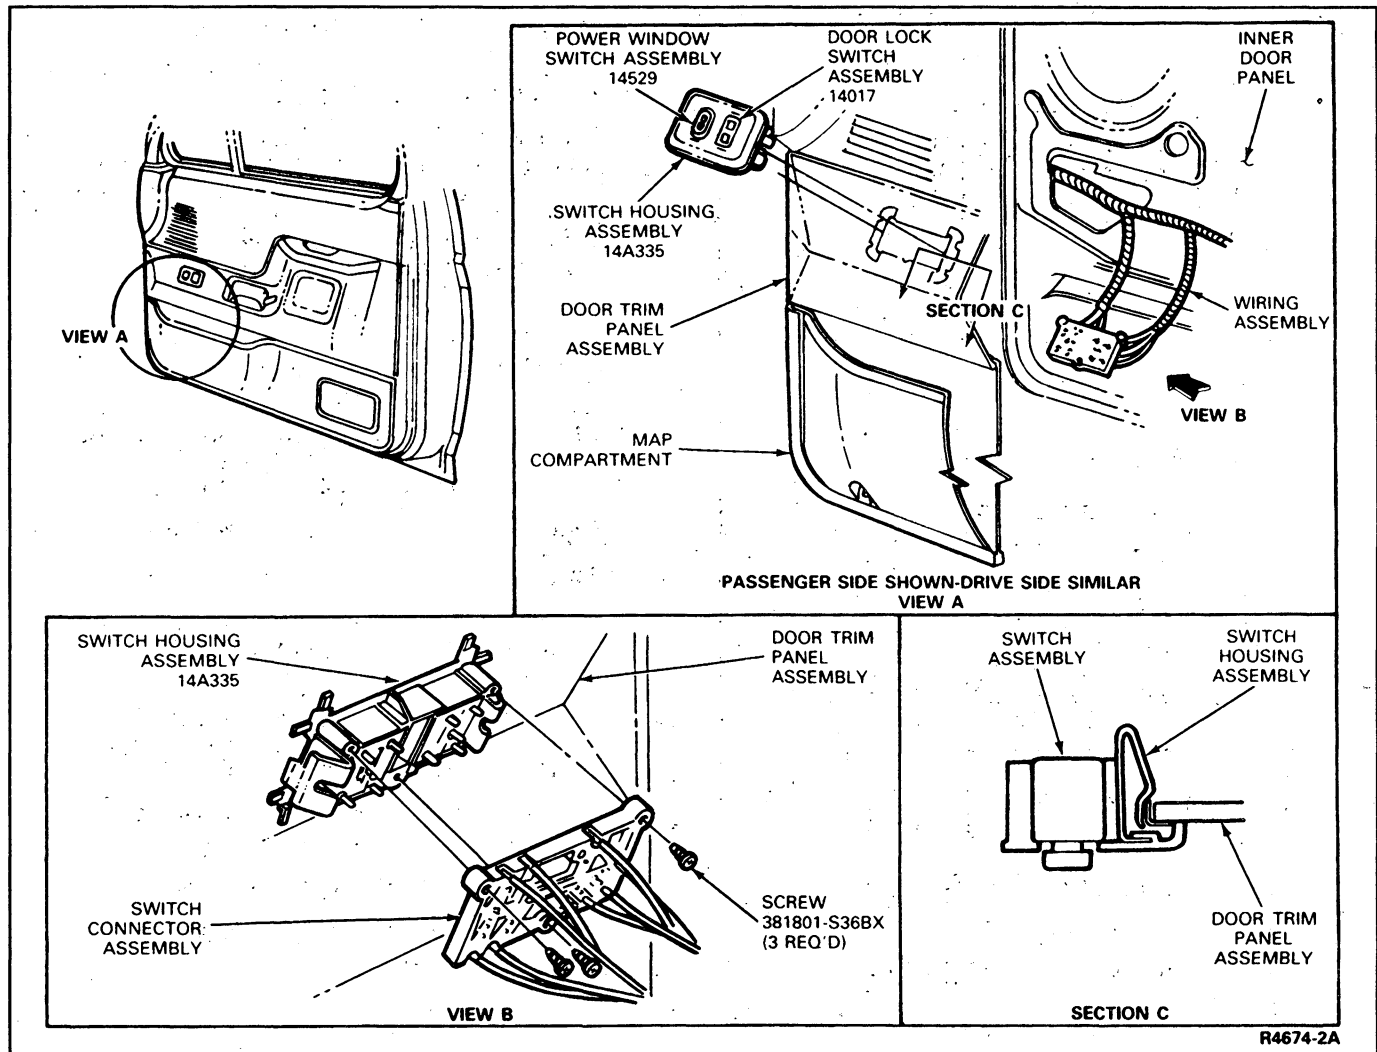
RH Power Window Switch—F-150, F-250, F-350, F-Super Duty and Bronco
